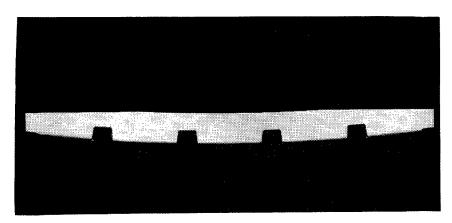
Completed Rib Cap Formed from Sheet B/Al.
